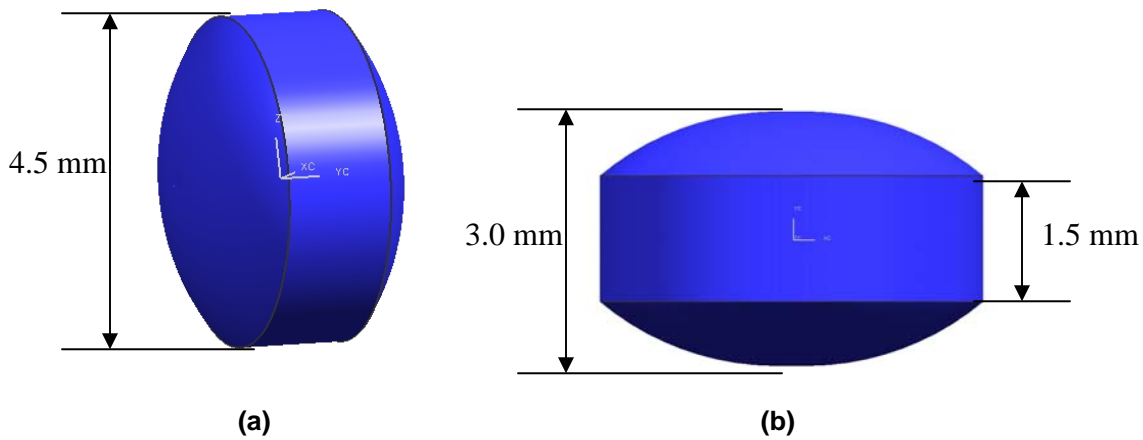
CAD model of pellet in (a) inverted and (b) flat views.
